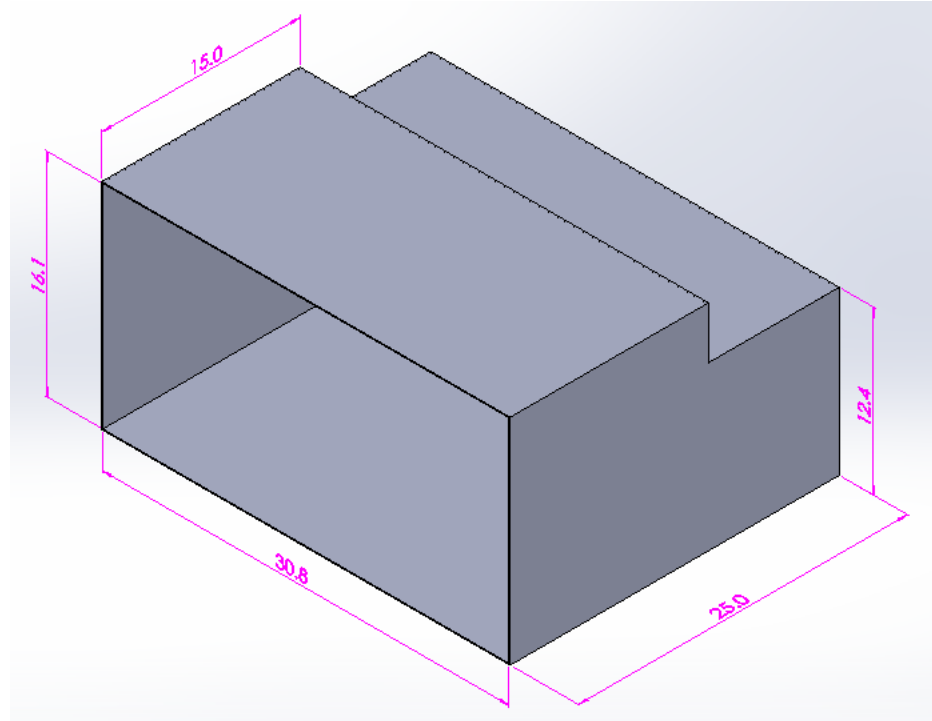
Space allocation within Crown for our mechanism, dimensions shown in inches.
